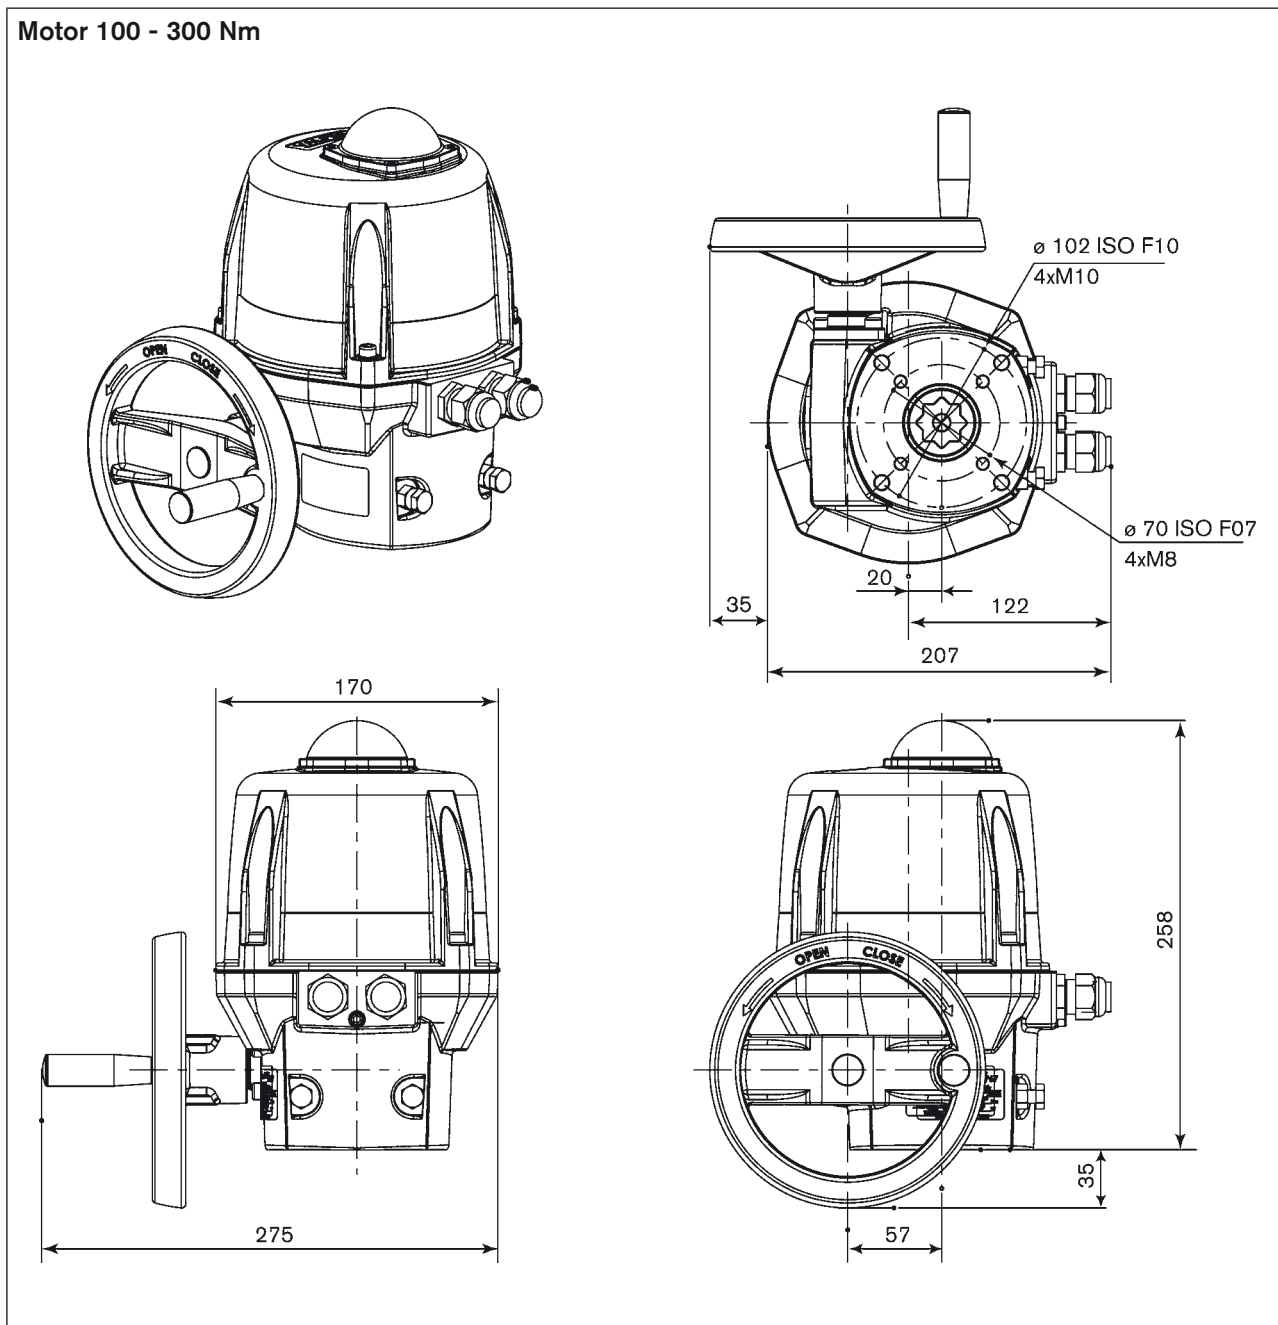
Dimensions Type 3005 with torque 100 - 300 Nm
